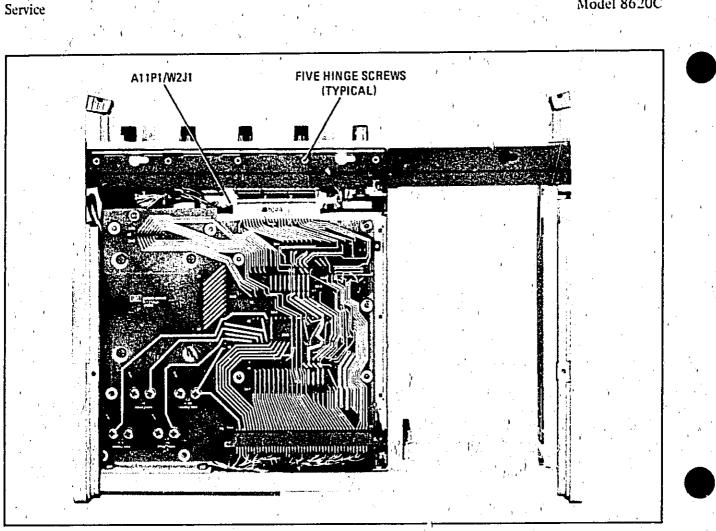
Removing Hinged Front Panel Assembly From Mainframe
